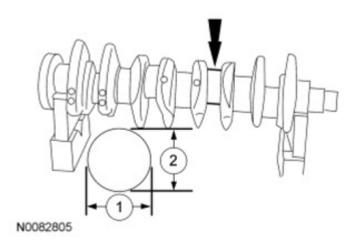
Measuring Crankshaft Connecting Rod Bearing Journal Diameters Courtesy of FORD MOTOR CO.
